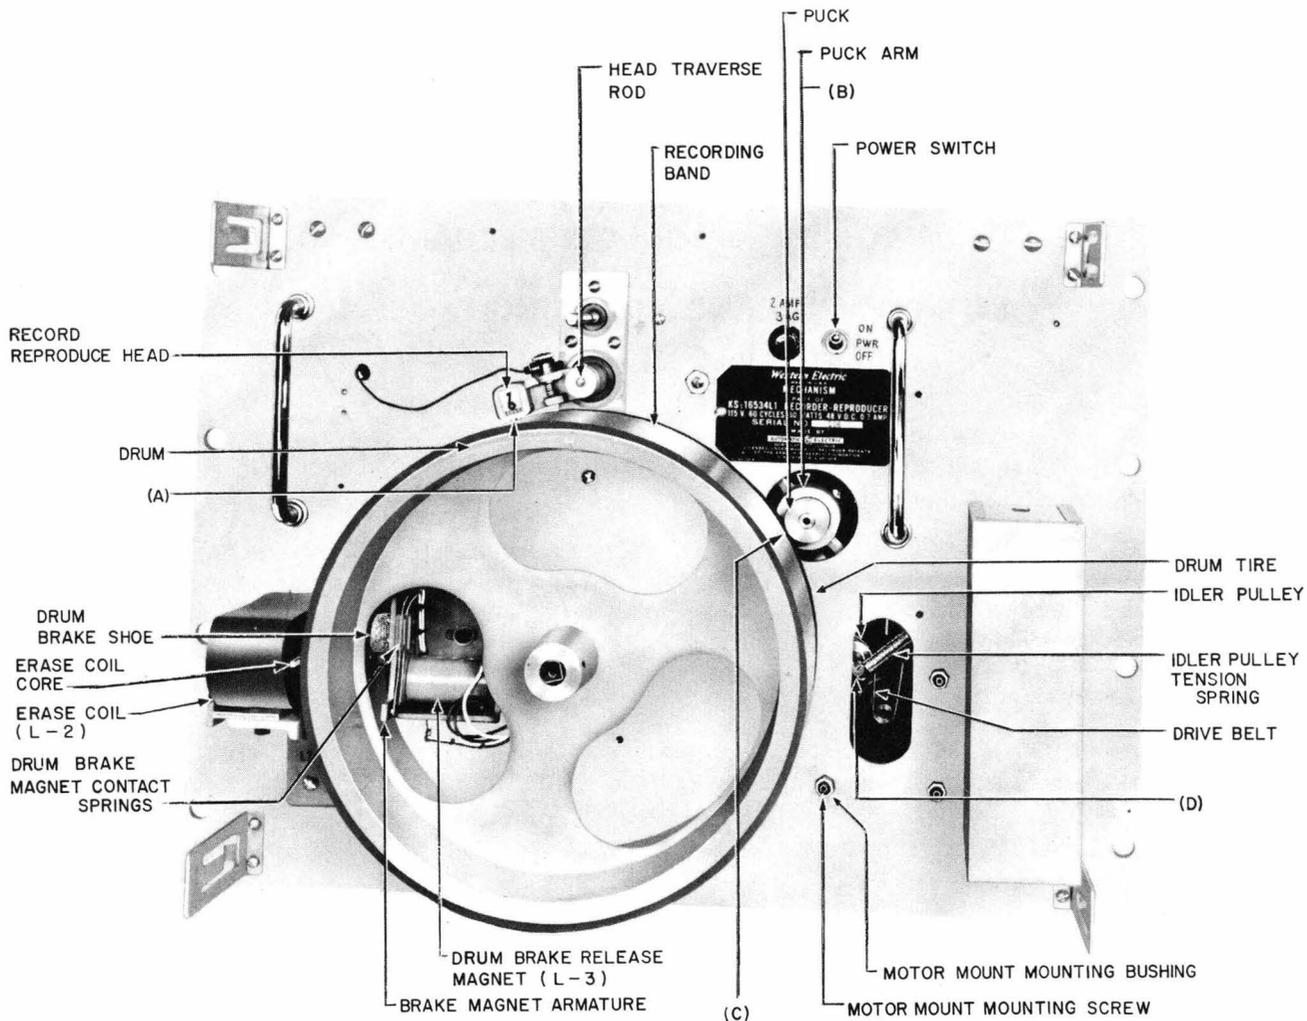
Recorder-Reproducer Mechanism — Front View (Cover Removed)
